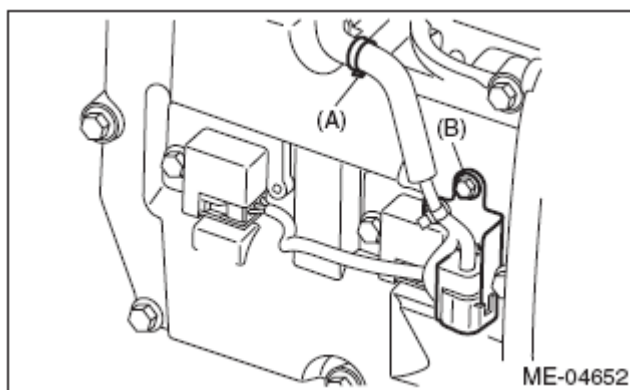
Identifying Rocker Cover Stay And Engine Harness Clip
